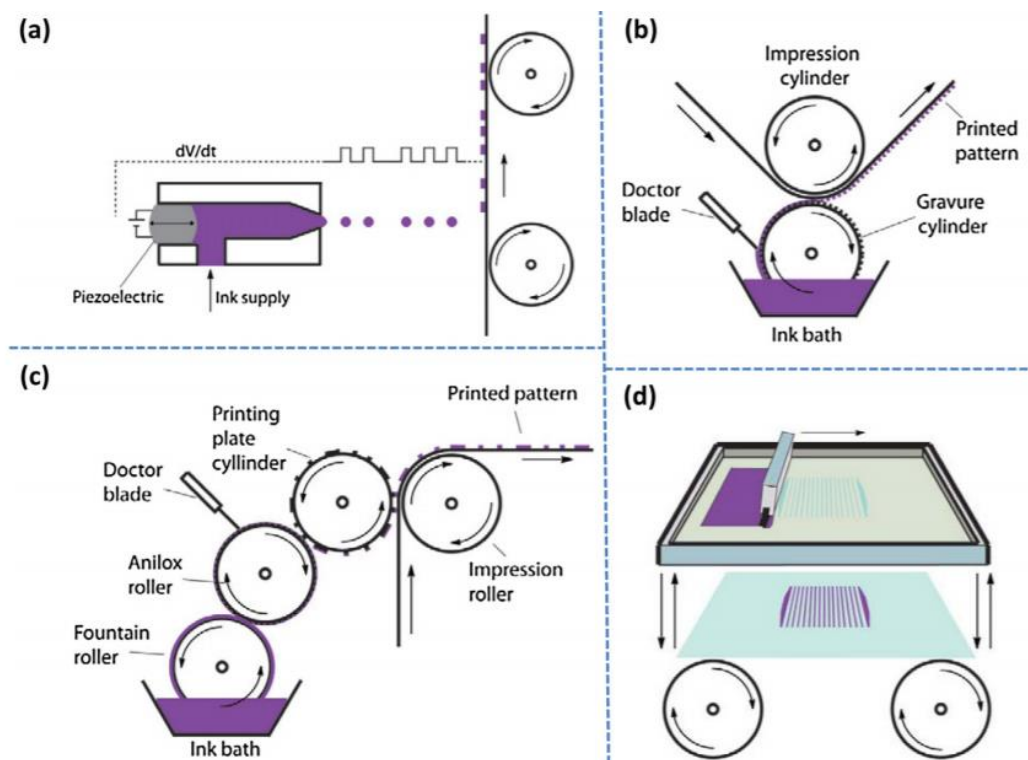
PE main manufacturing techniques a) Inkjet printing b) gravure printing c) flexographic printing and d) screen printing taken from [51].
